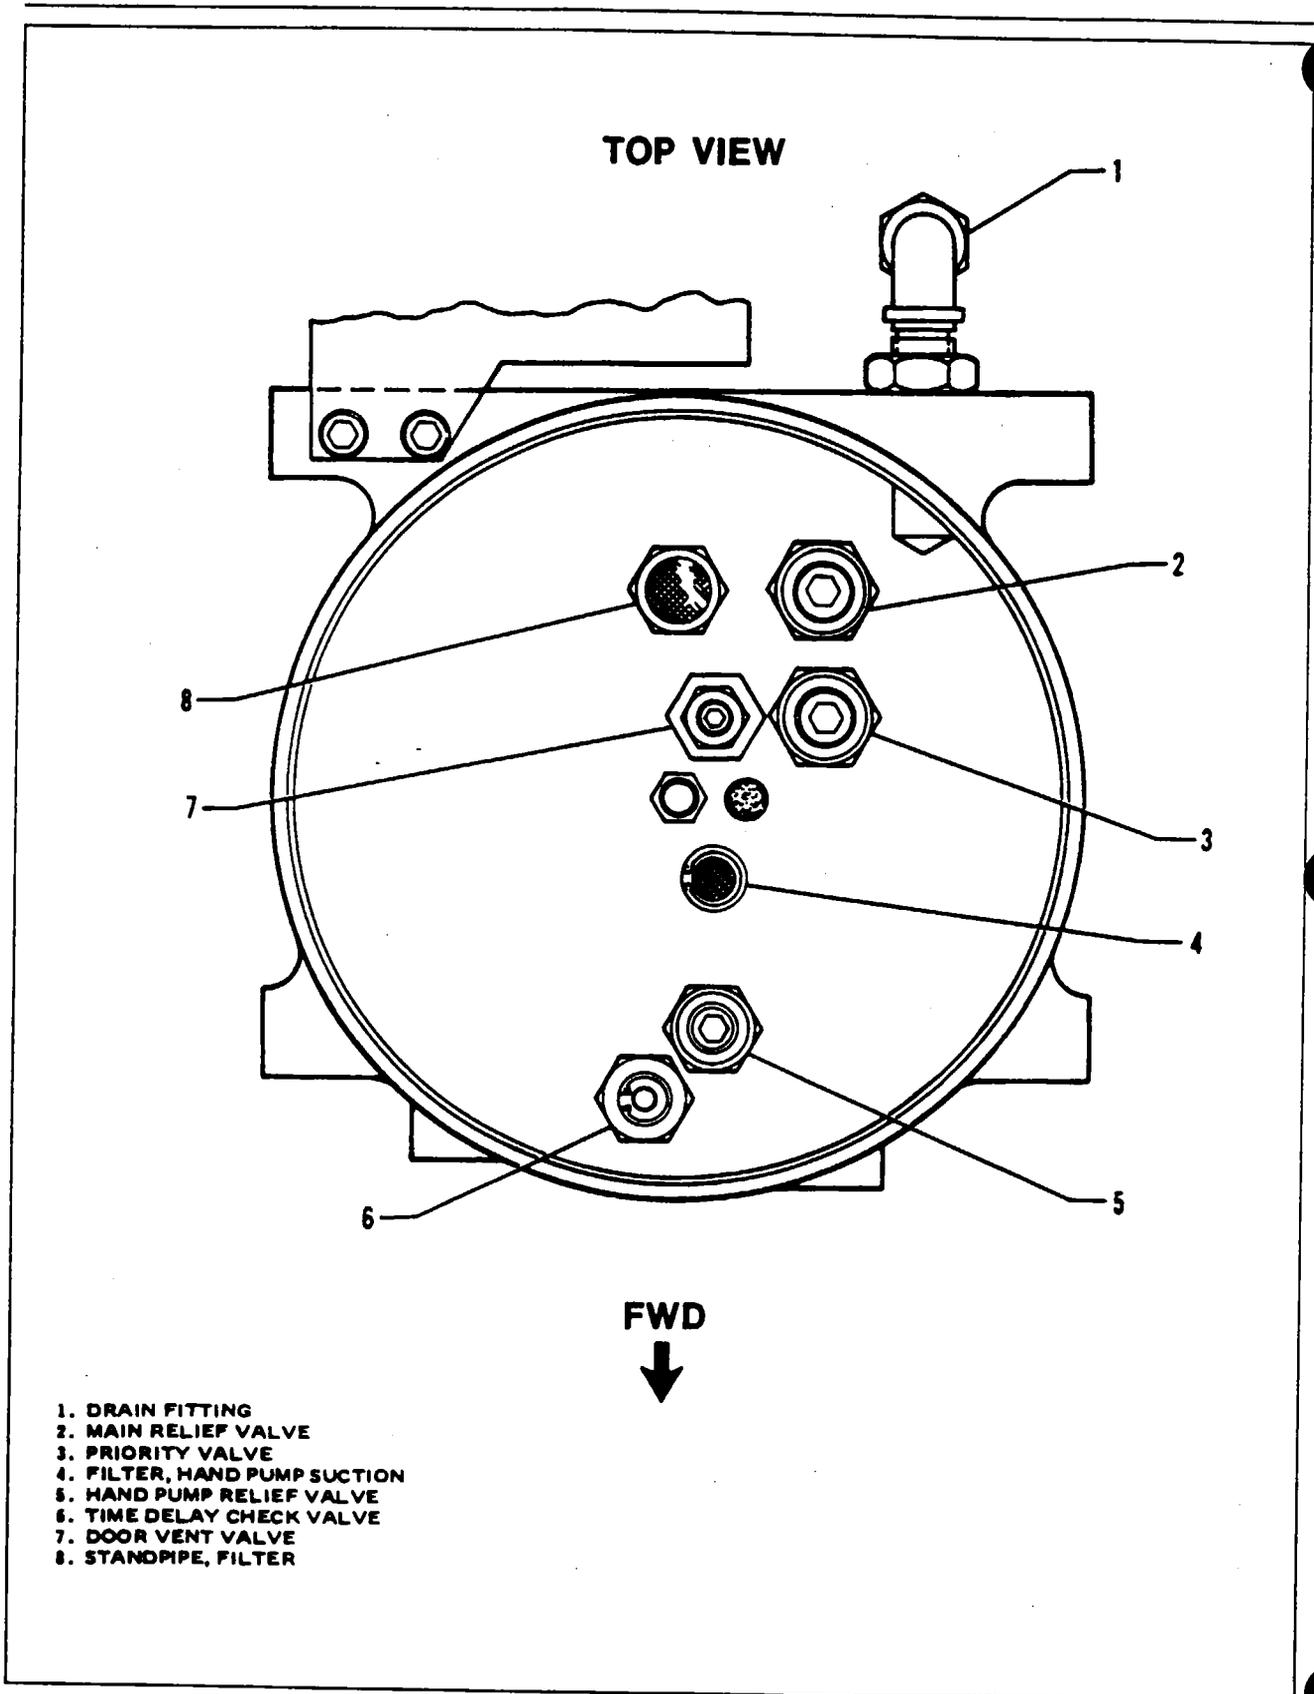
Location of Power Pack Components (Wiebel Tool)
